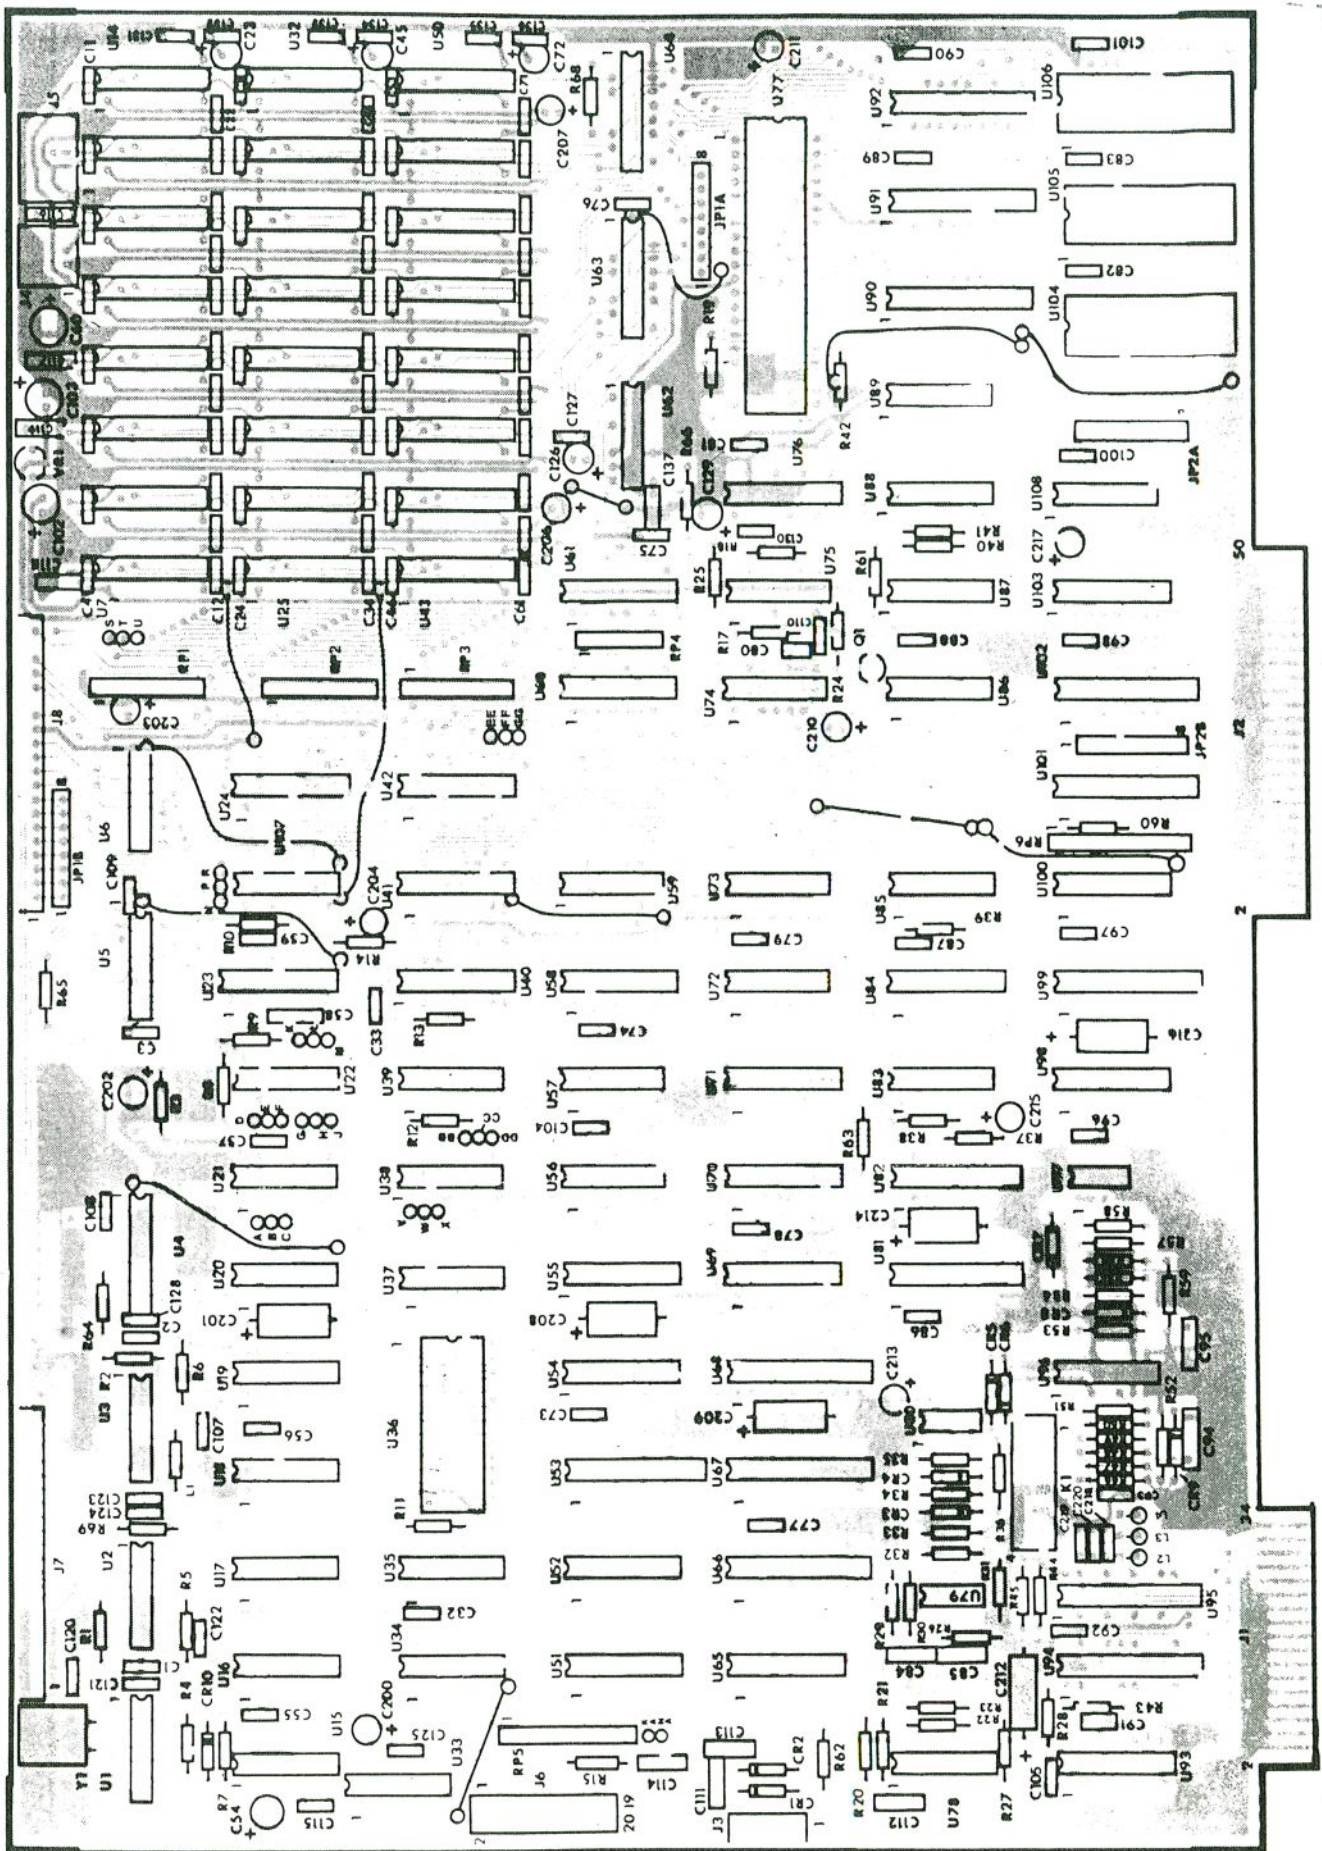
CPU PRINTED CIRCUIT BOARD – COMPONENT SIDE
